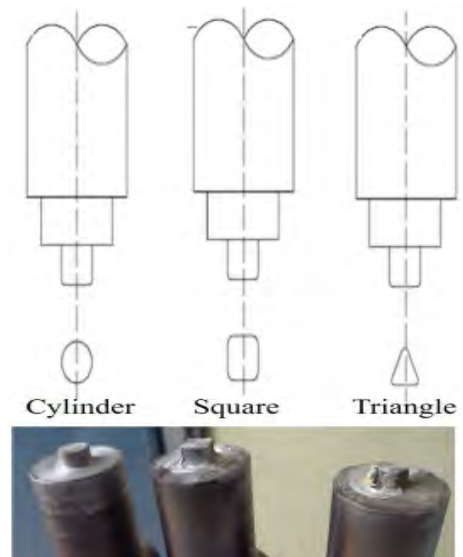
Tool geometry employed in the friction stir welding experiments
